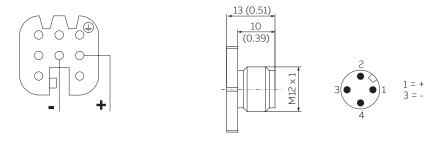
Pin layout of Harting HAN 8D (socket view) and M12 x 1 connector
